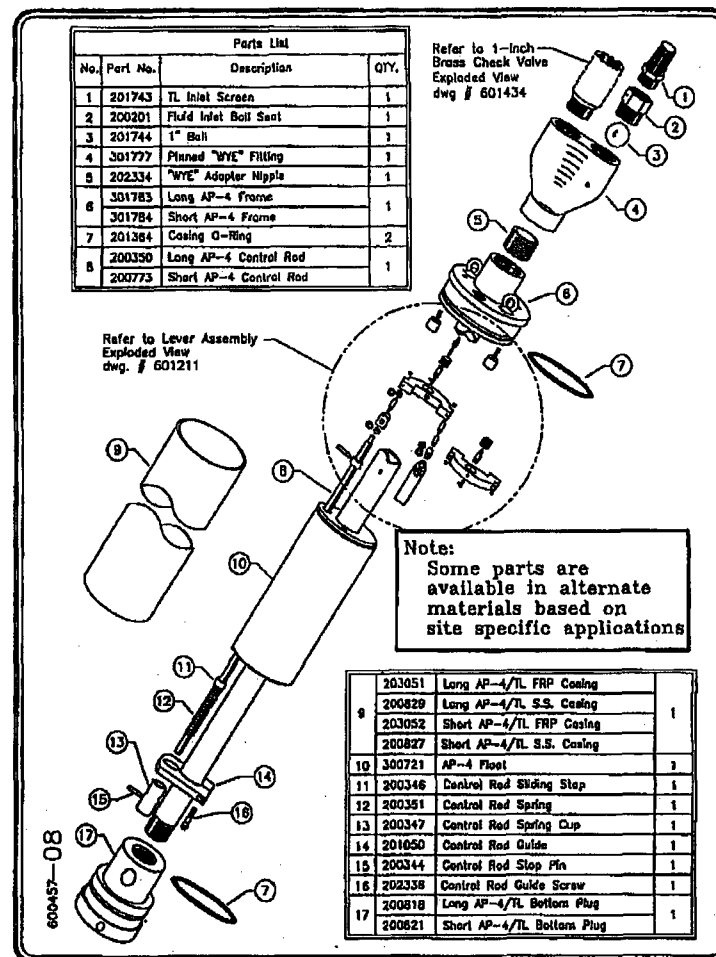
Exploded View of a Top-Loading AutoPump AP-4 (Long & Short)
